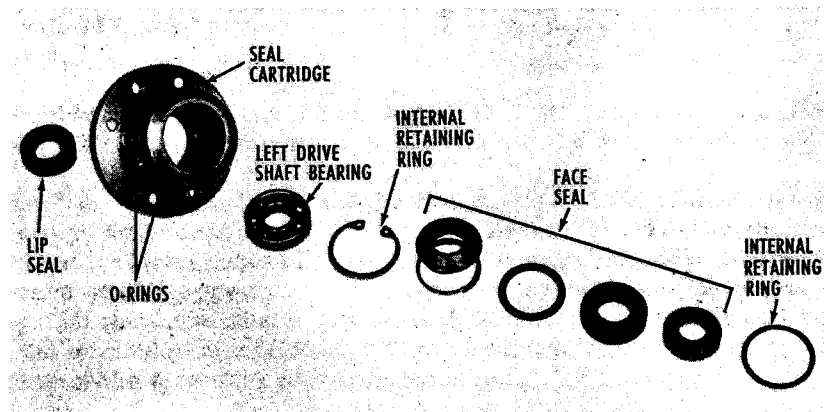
SEAL CARTRIDGE DISASSEMBLED
